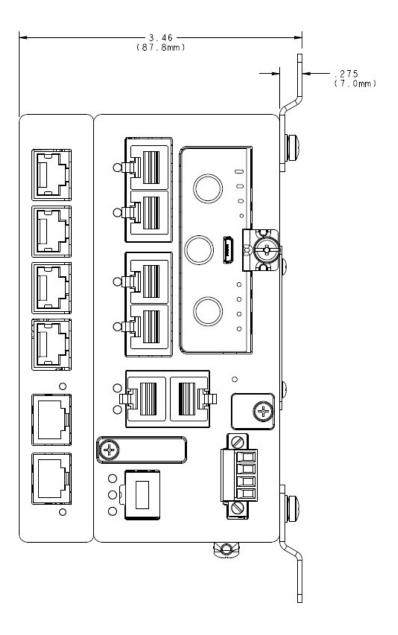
Wall/Floor mounting clearance and overall dimensions with mounting brackets attached
